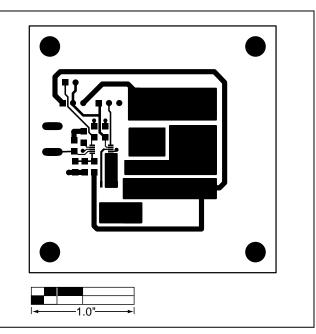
MAX668 EV Kit PC Board Layout—Component Side
